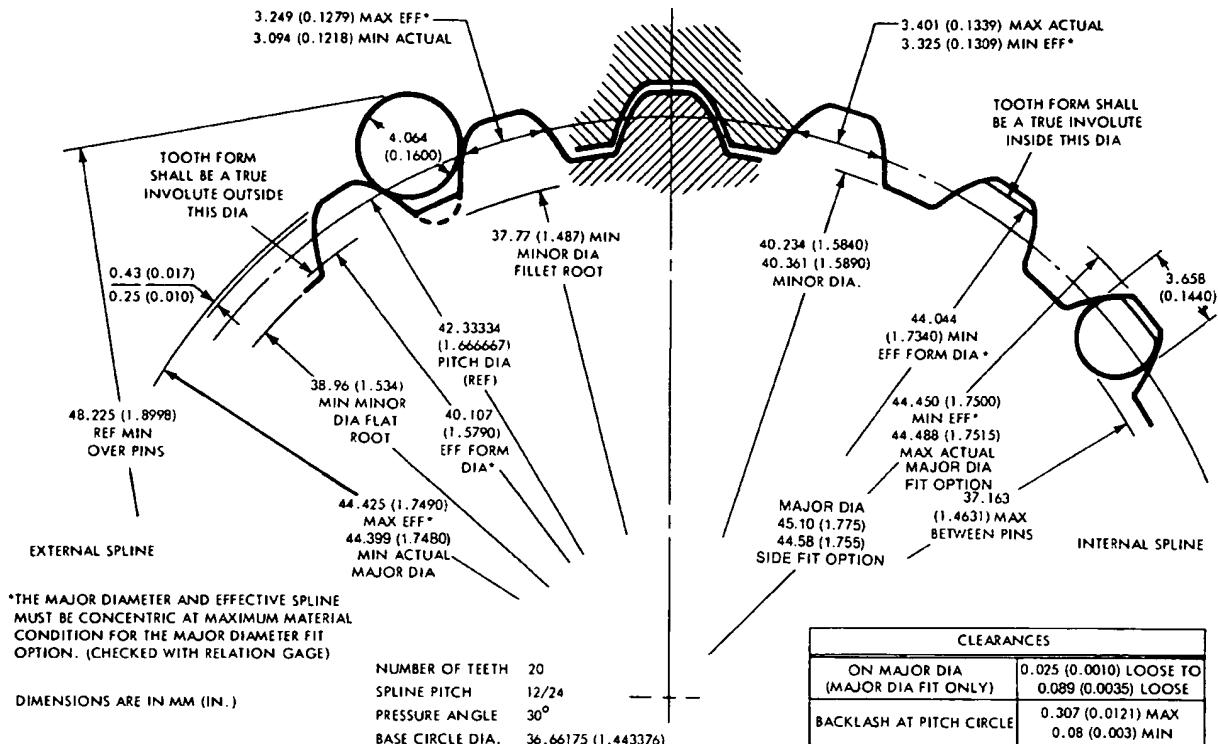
Type 3 power take-off 1000 r/min-45 mm (1 3/4 in.) diameter-involute spline dimensions
